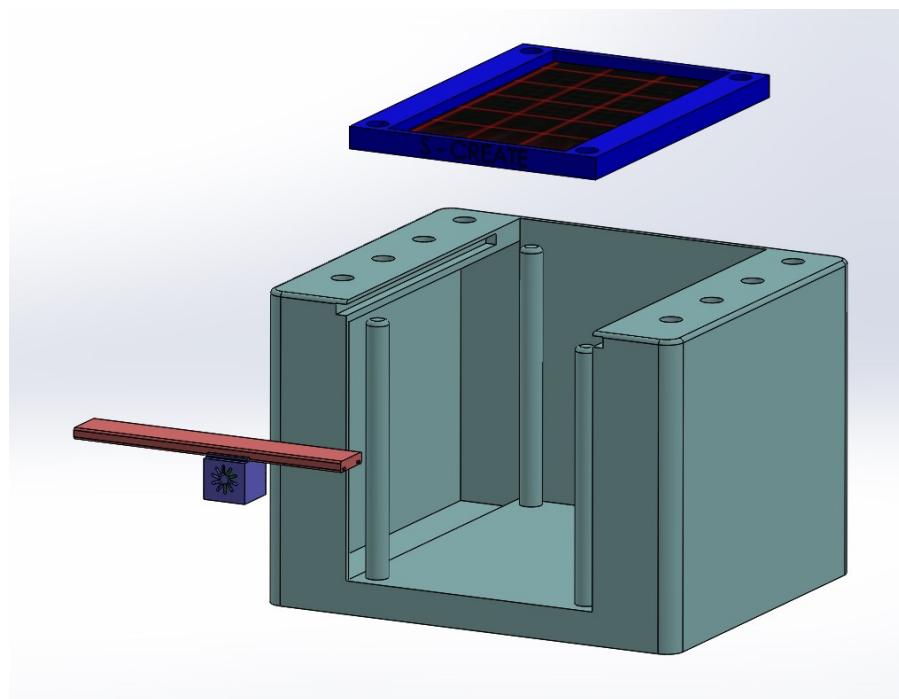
Ferrarer, Auston: Assembly Step 3
